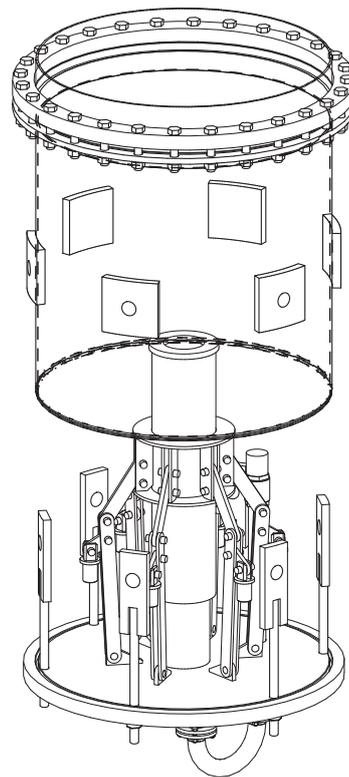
Casing-pipe obturator with scissors mechanism after opening.
